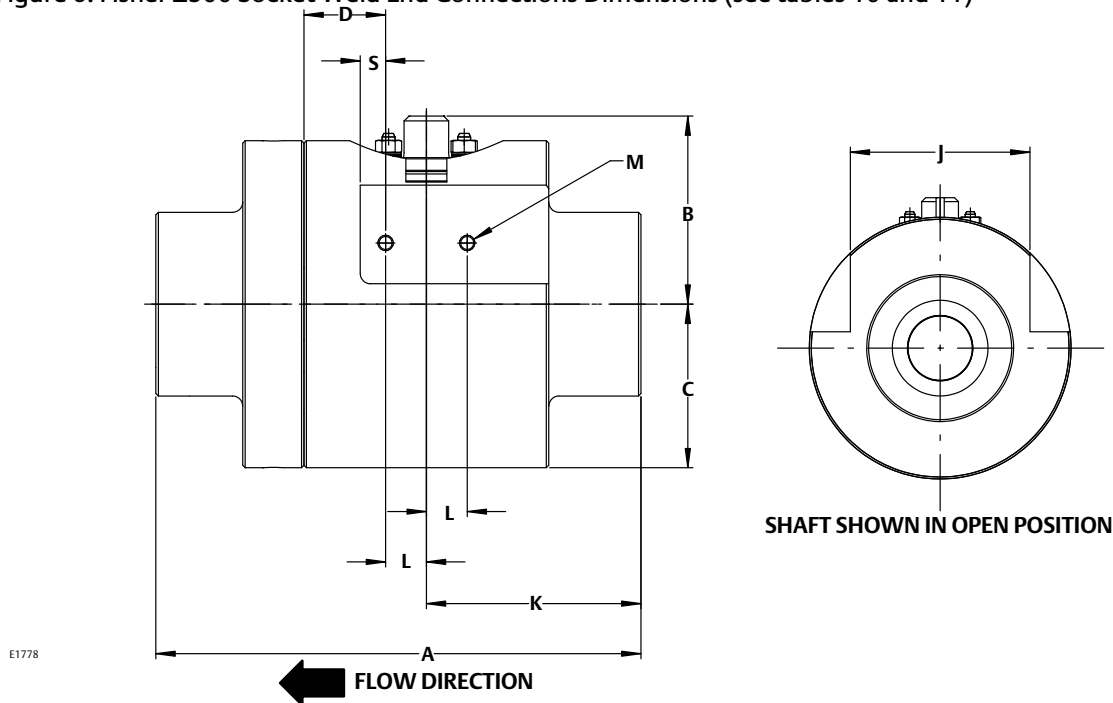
Fisher Z500 Socket Weld End Connections Dimensions (see tables 10 and 11)
